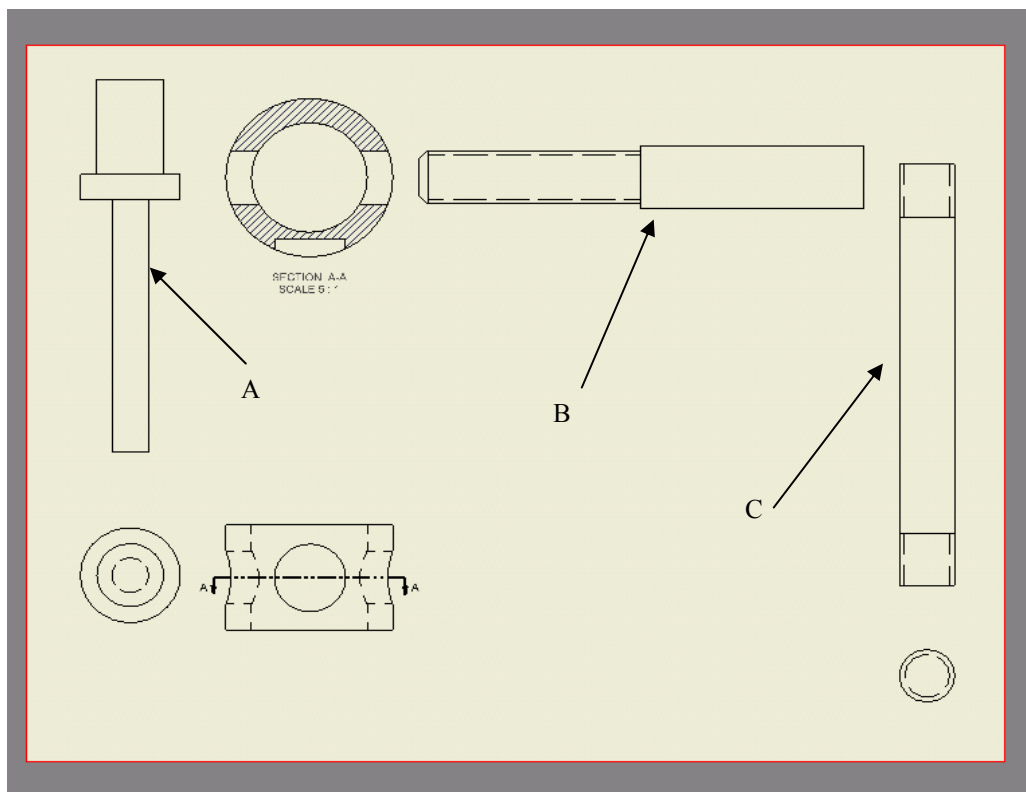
(A) Shaft; (B) Coupler; (C) Steel arm
